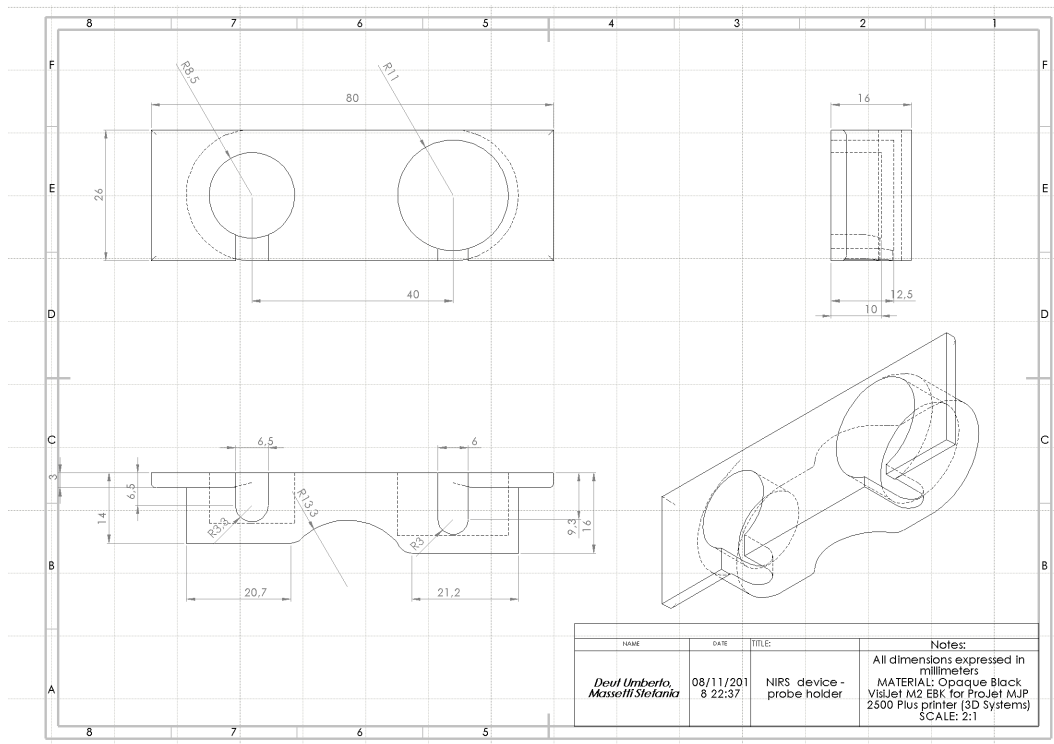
Technical drawing of the holder designed to contain the probes.
